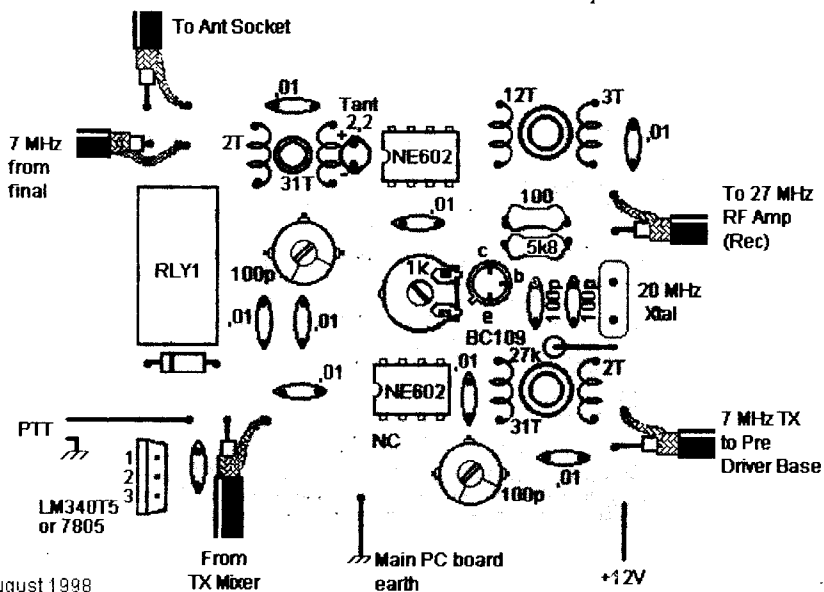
Printed circuit board for the CB to HF transverter. It is printed actual size.
